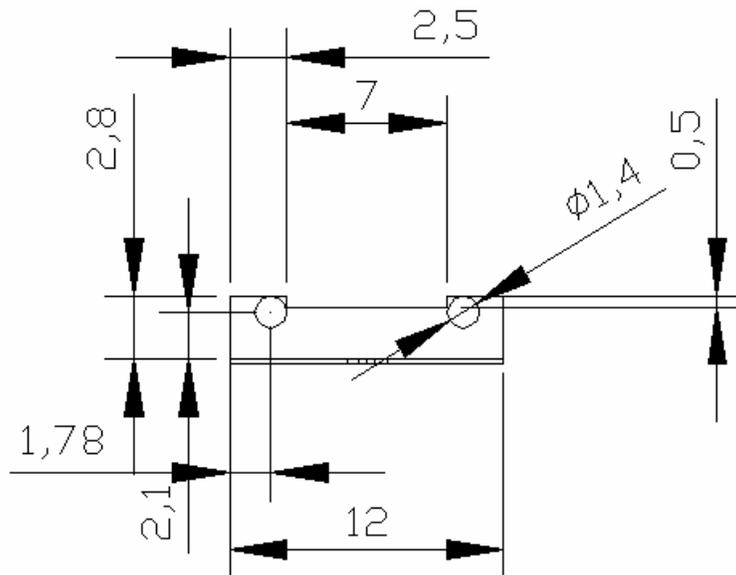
Cam sensor mounting bracket, top dimensions, dimensions in cm.
